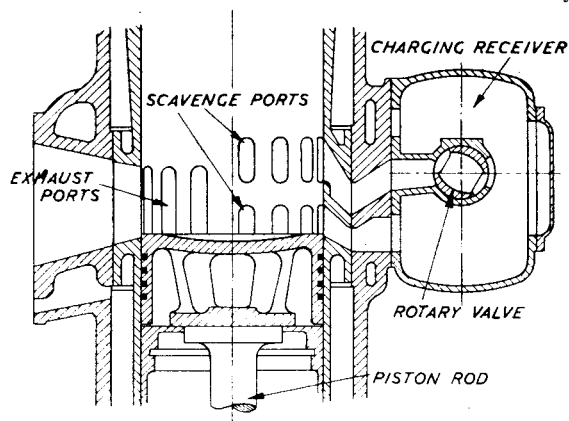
Rotary scavenge valve of Sulzer oil engine.
